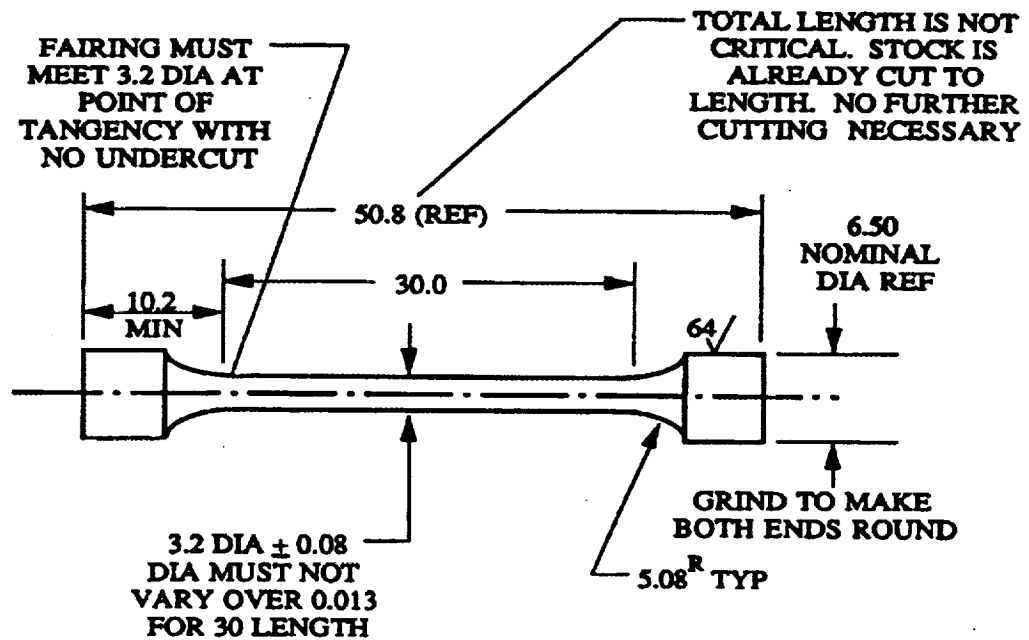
Tensile specimen design for testing extruded NiAl alloys. All dimensions are in millimeters.
